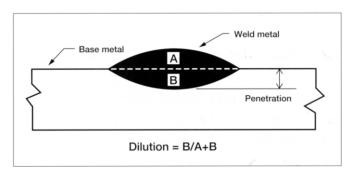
A method of calculating the dilution of bead-on-plate welds
